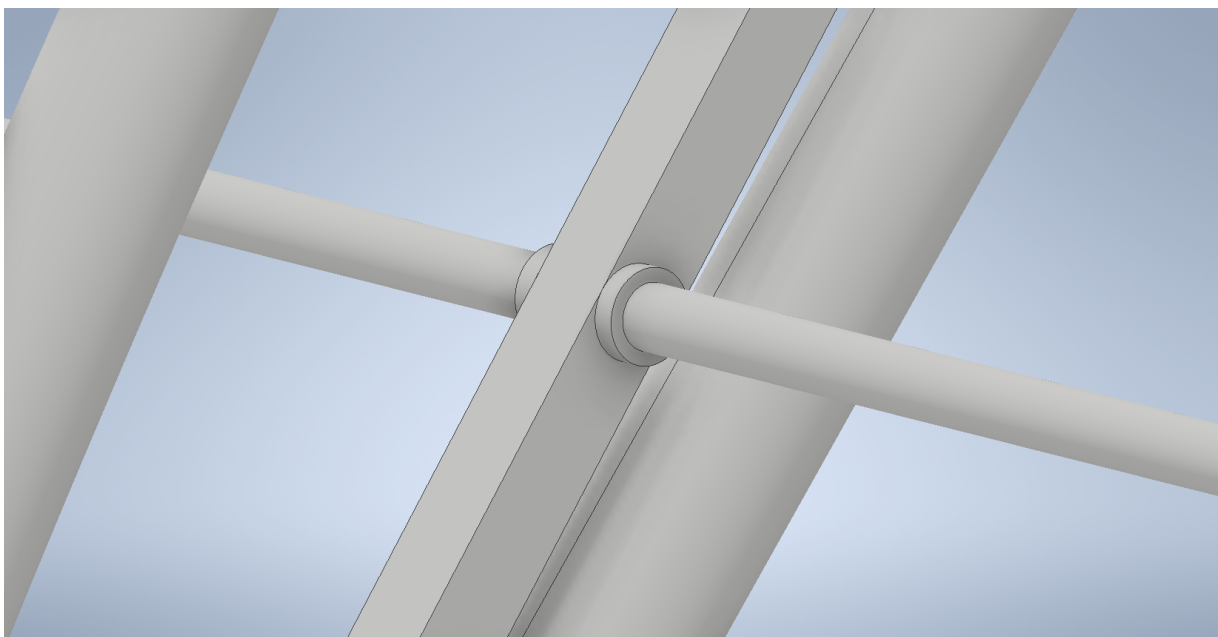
Isometric view of a wireframe section showing the assembly with the caps
